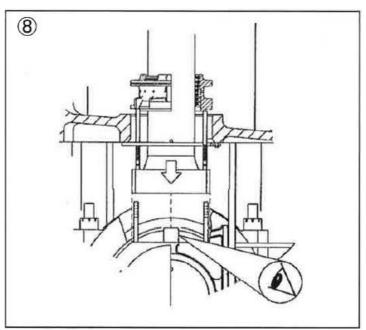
Diagram from the main engine manufacturer's manual for step 8 of piston mounting
